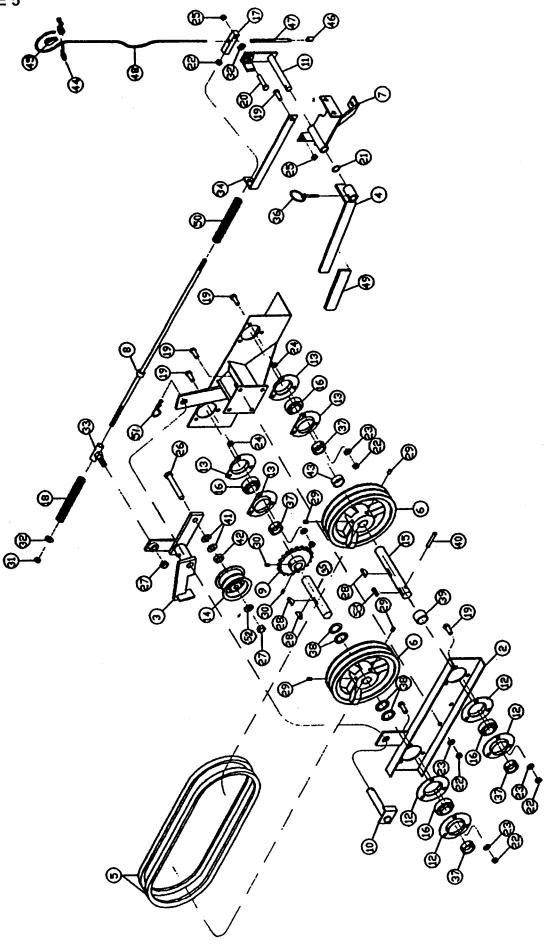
CROSS CONVEYOR CLUTCH - BELT DRIVE
